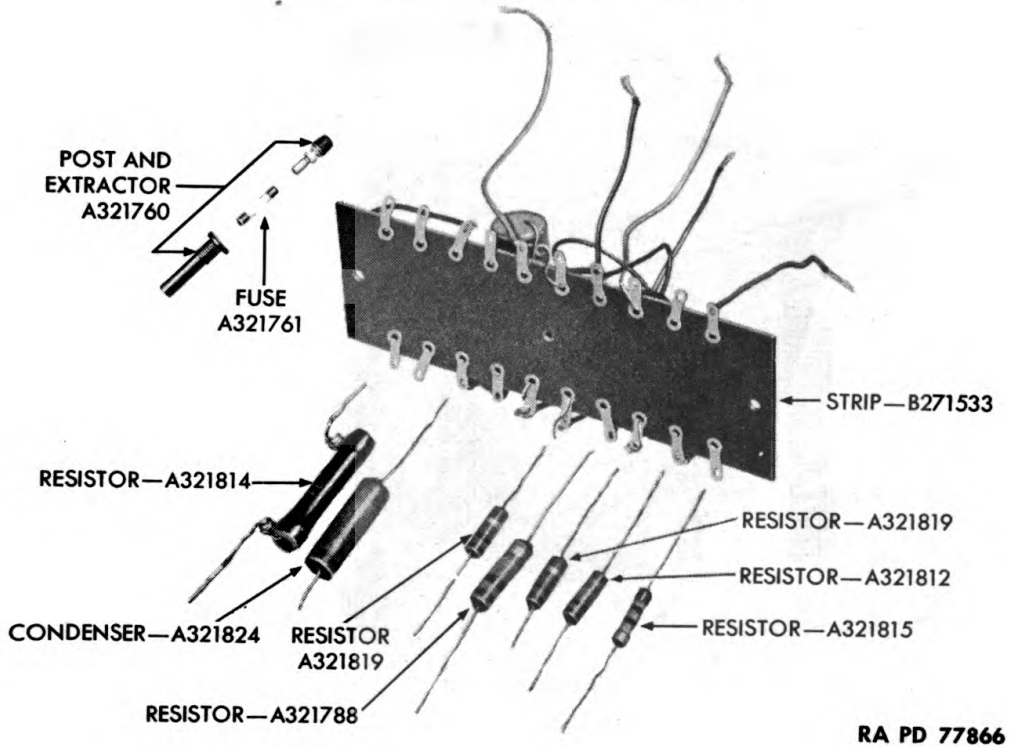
Removal of Parts From Upper Side of Mounting Strip
